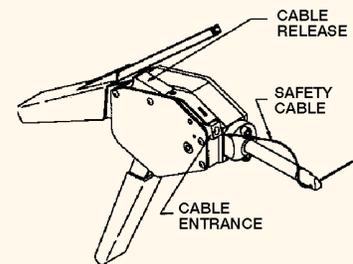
Pre-Set Tension Safe-T-Cable® Tool
